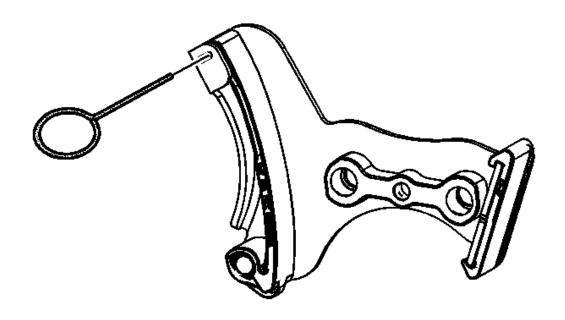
View Of Compressed Tensioner Courtesy of GENERAL MOTORS CORP.
